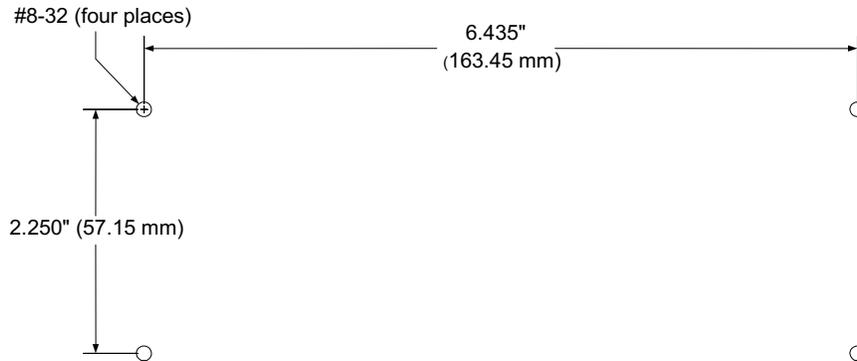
Mounting Diagram for IC690RBT001 Rechargeable Battery
